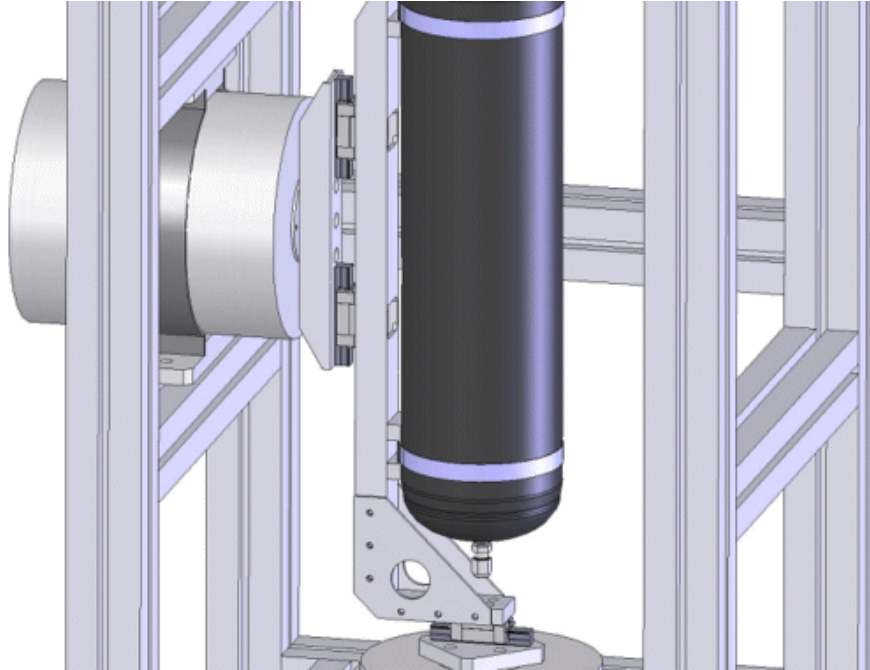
Solid model of shaker assembly with linear roller bearings and vessel support for independent biaxial vibration.²⁵⁰
